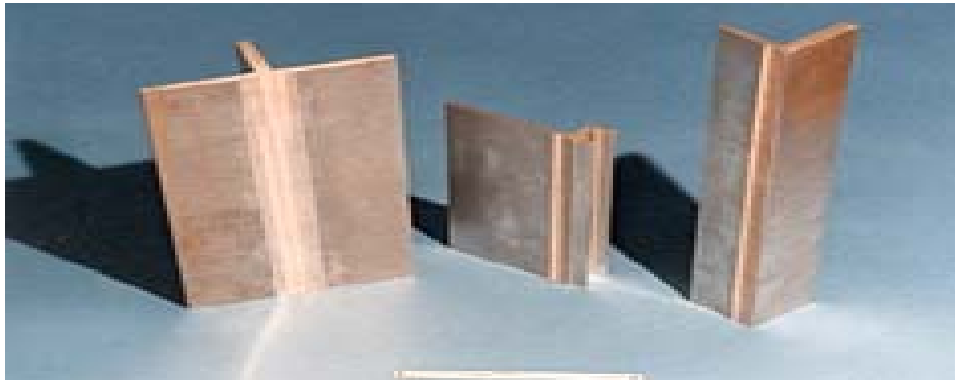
Typical Friction Stir Weld Joints in Aluminum
